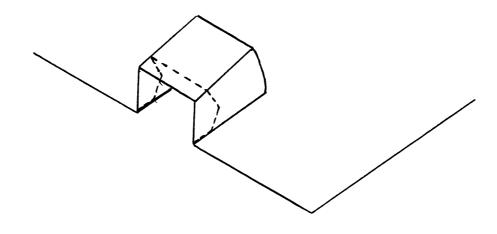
Cutting away mass balance arm boxes to fit aileron closeout.
